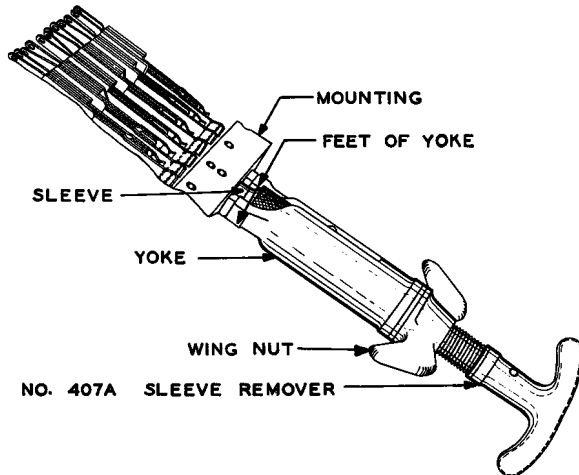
Method of Extracting Sleeve With 407A Sleeve Remover
